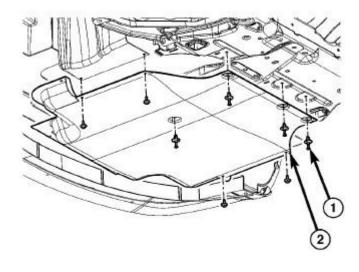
Belly Pan Courtesy of CHRYSLER LLC
